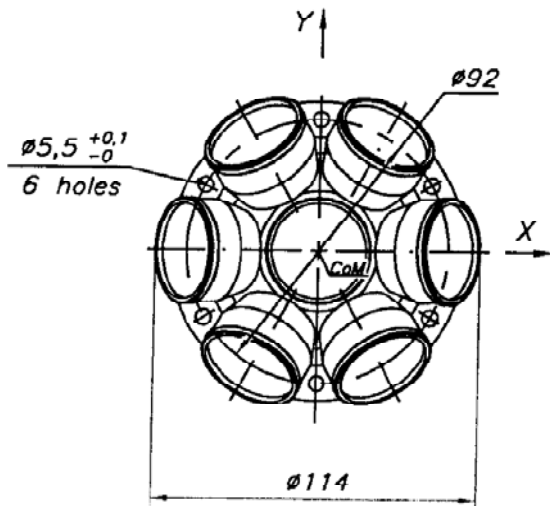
Design drawing of PROBA-2 Laser Retro Reflector Array (top view [3])
